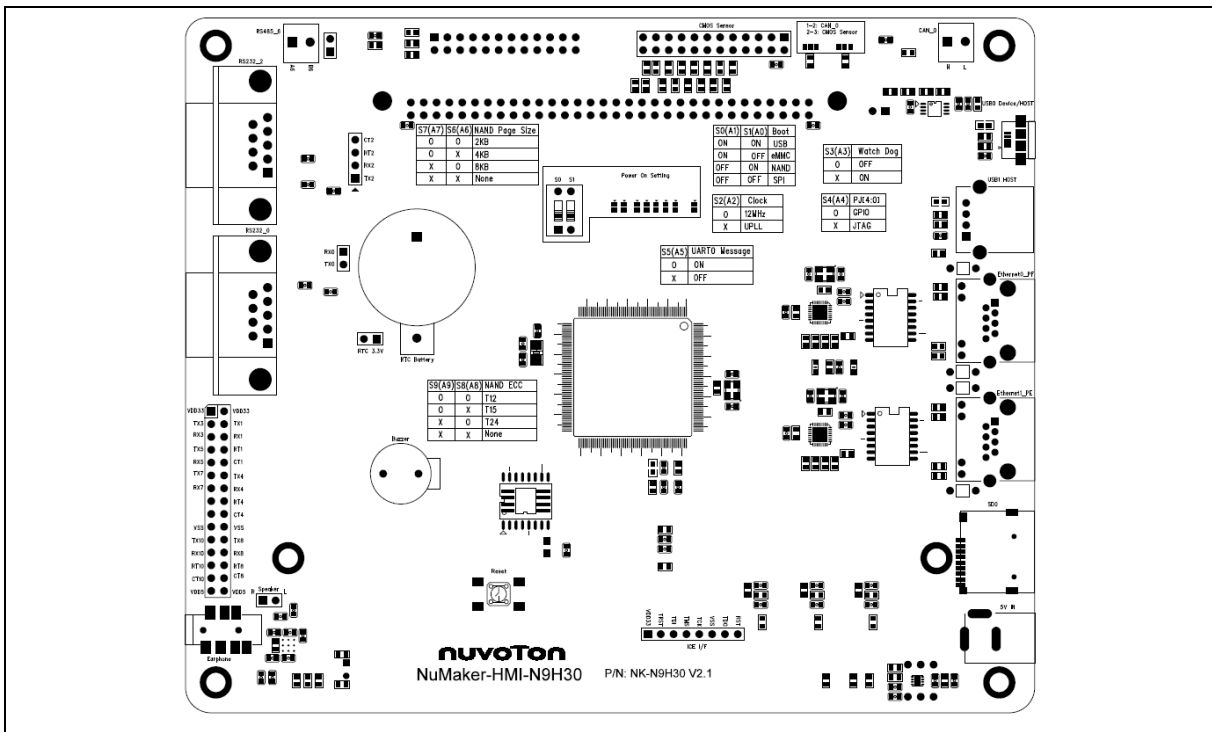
Rear View of NuMaker-N9H30 PCB Placement
